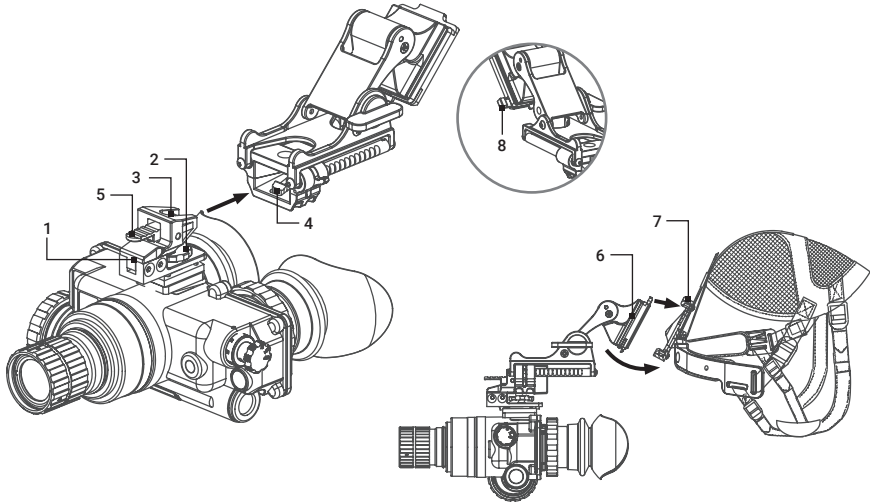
MOUNTING WOLF-7 PRO TO HEADGEAR ASSEMBLY
